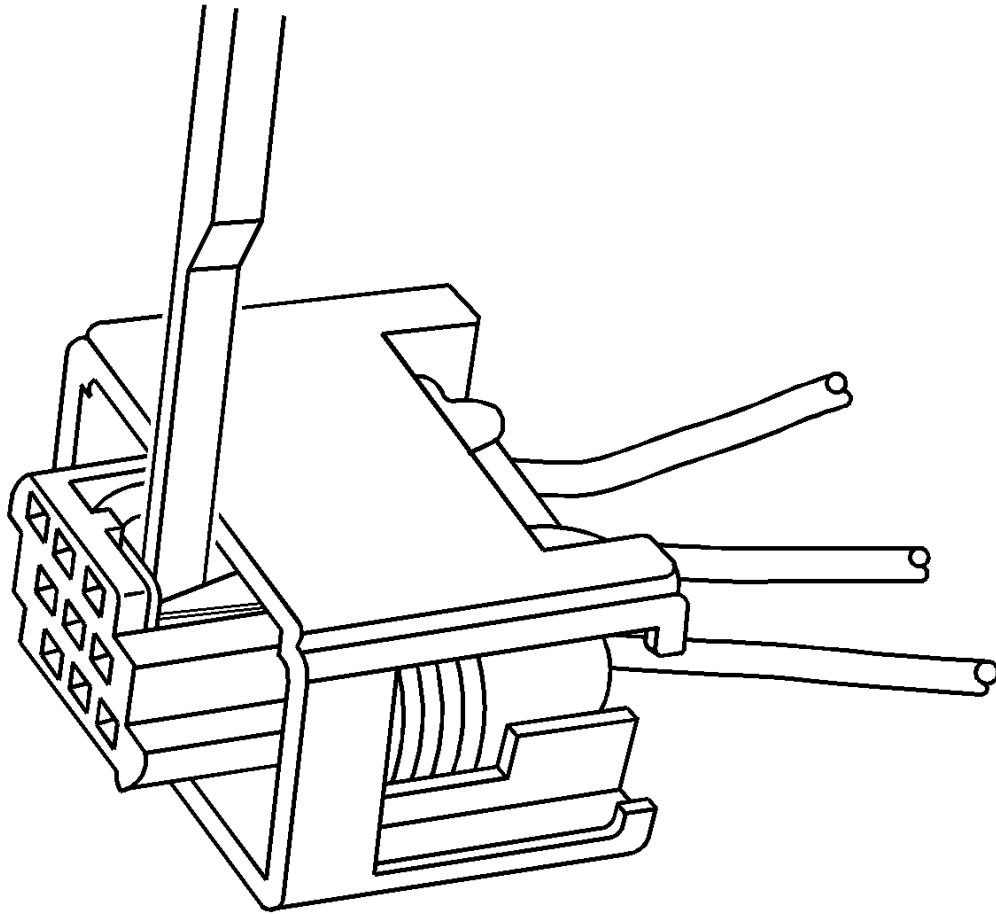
View Of Inserting Tool Into Terminal Release Tang Access Slot (Sensor)
